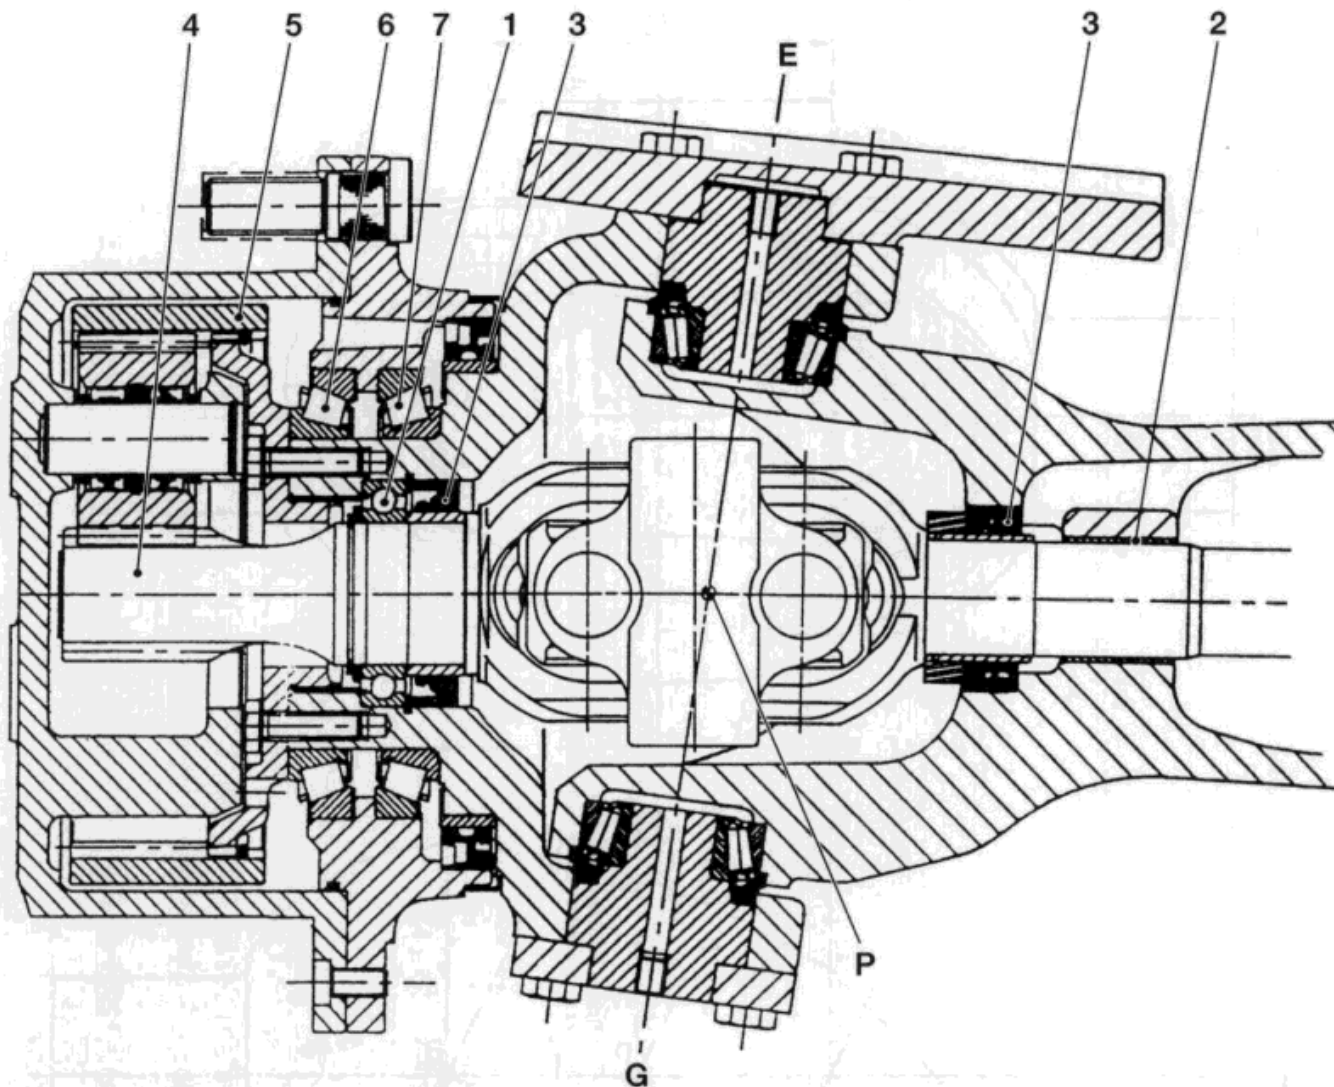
Driven, rigid steering axle with dual joint made by the company GKN – Birfield AG for four-wheel drive special-purpose vehicles, tractors and construction machinery.
